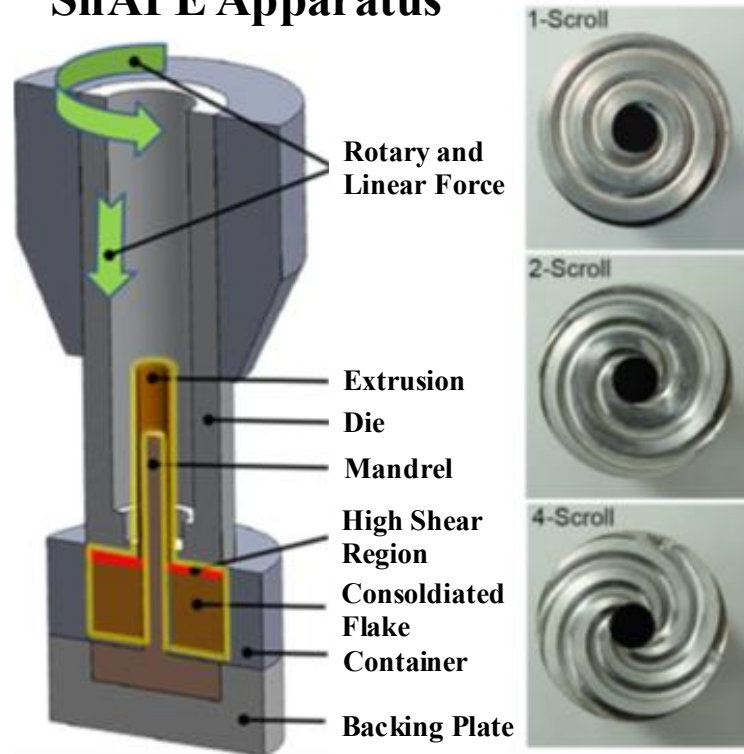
Diagram of the ShAPE process and an image of the extrusion die faces used in this work. From top to bottom, the extrusion die with 1, 2, and 4-scroll patterns [60].
